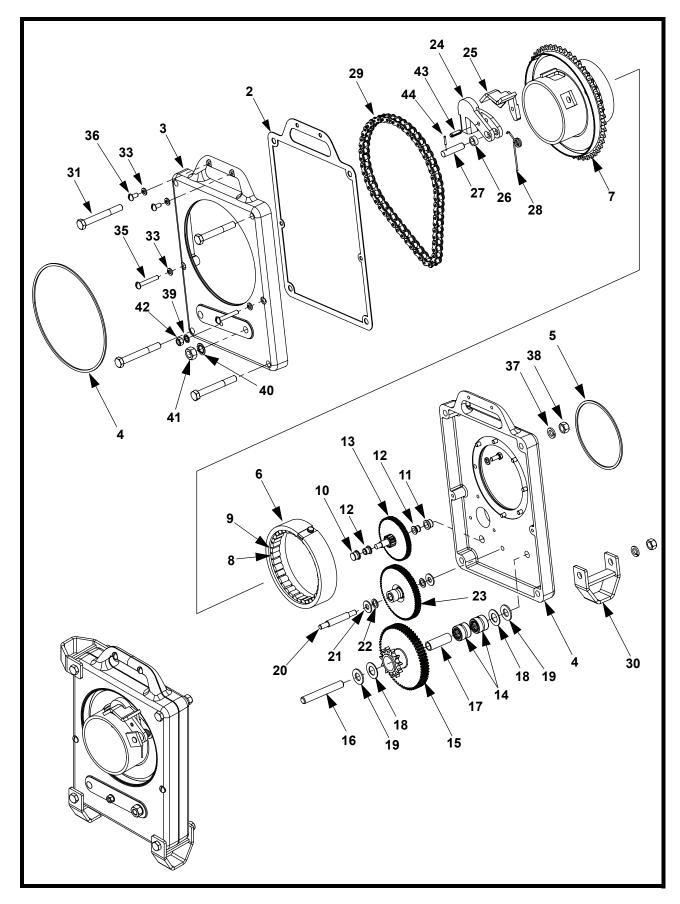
Martin® Gate Jack Opener Assembly, P/N M950-X (Sheet 1 of 2)
